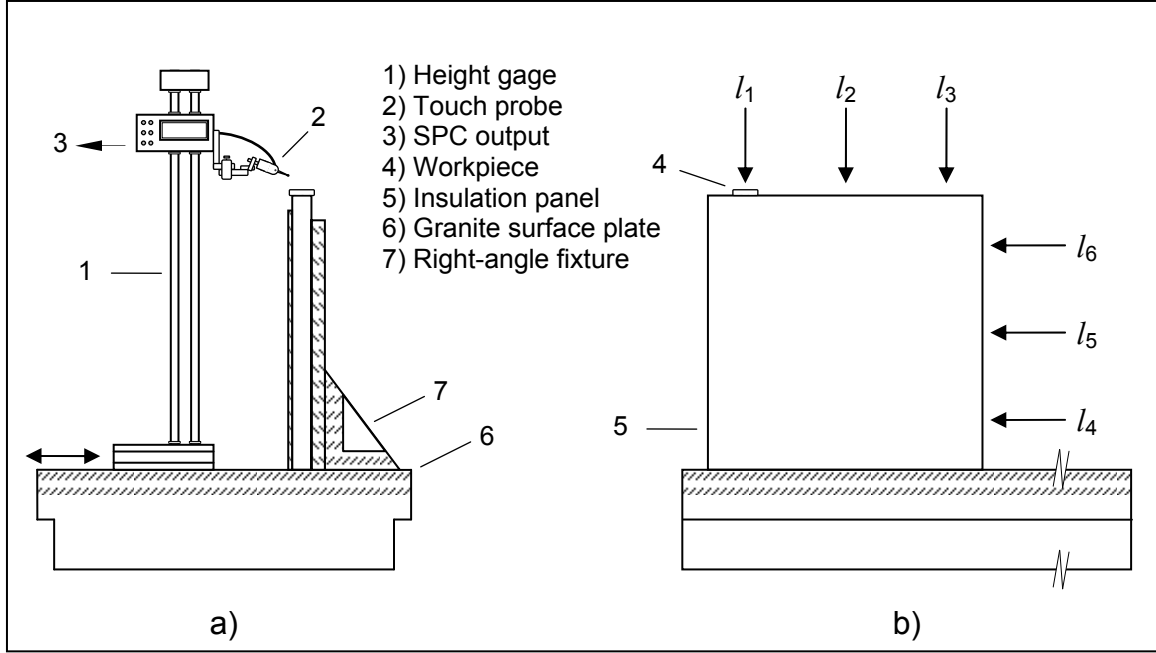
a) Side view shows 610 mm height gage and right-angle fixture with insulation panel clamped between the aluminum jig plate and aluminum sheet. b) Front view shows panel length measurements at locations  $l_1$ ,  $l_2$ ,  $l_3$ ,  $l_4$ ,  $l_5$ , and  $l_6$  (fixture and height gage are not shown). For a particular group of 50 panels, one panel was measured at all locations and the other 49 panels were measured at locations  $l_2$  and  $l_5$ .
